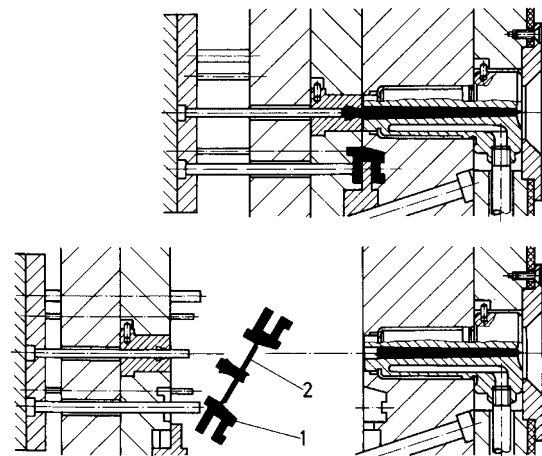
Example of a standardized cold runner bush applied to a two-cavity thermoset injection mold
